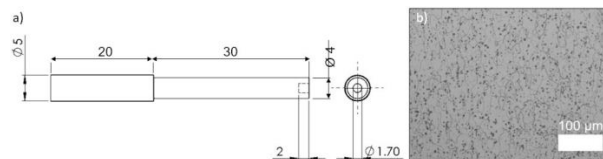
AA6056-T6 rivet: (a) rivet geometry; (b) microstructure of base material.
